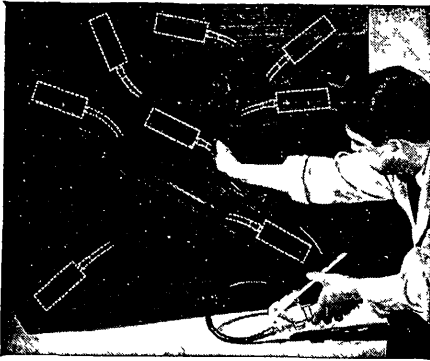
Variety of inaccessible places where hydraulic expanding wedge can be used
